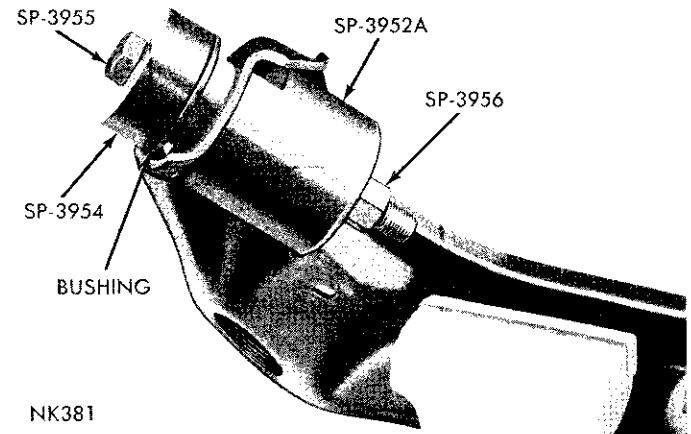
Installing Upper Control Arm Bushing (Chrysler)
